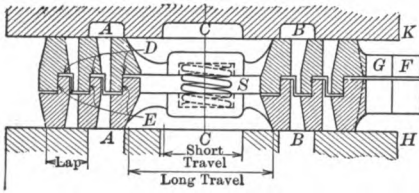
SKINNER PRESSURE-PLATE VALVE
